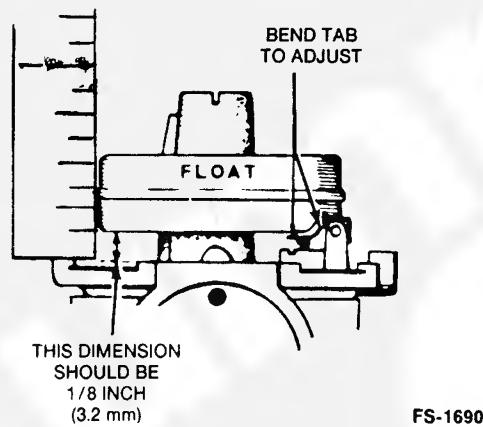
CARBURETOR FLOAT ADJUSTMENT
